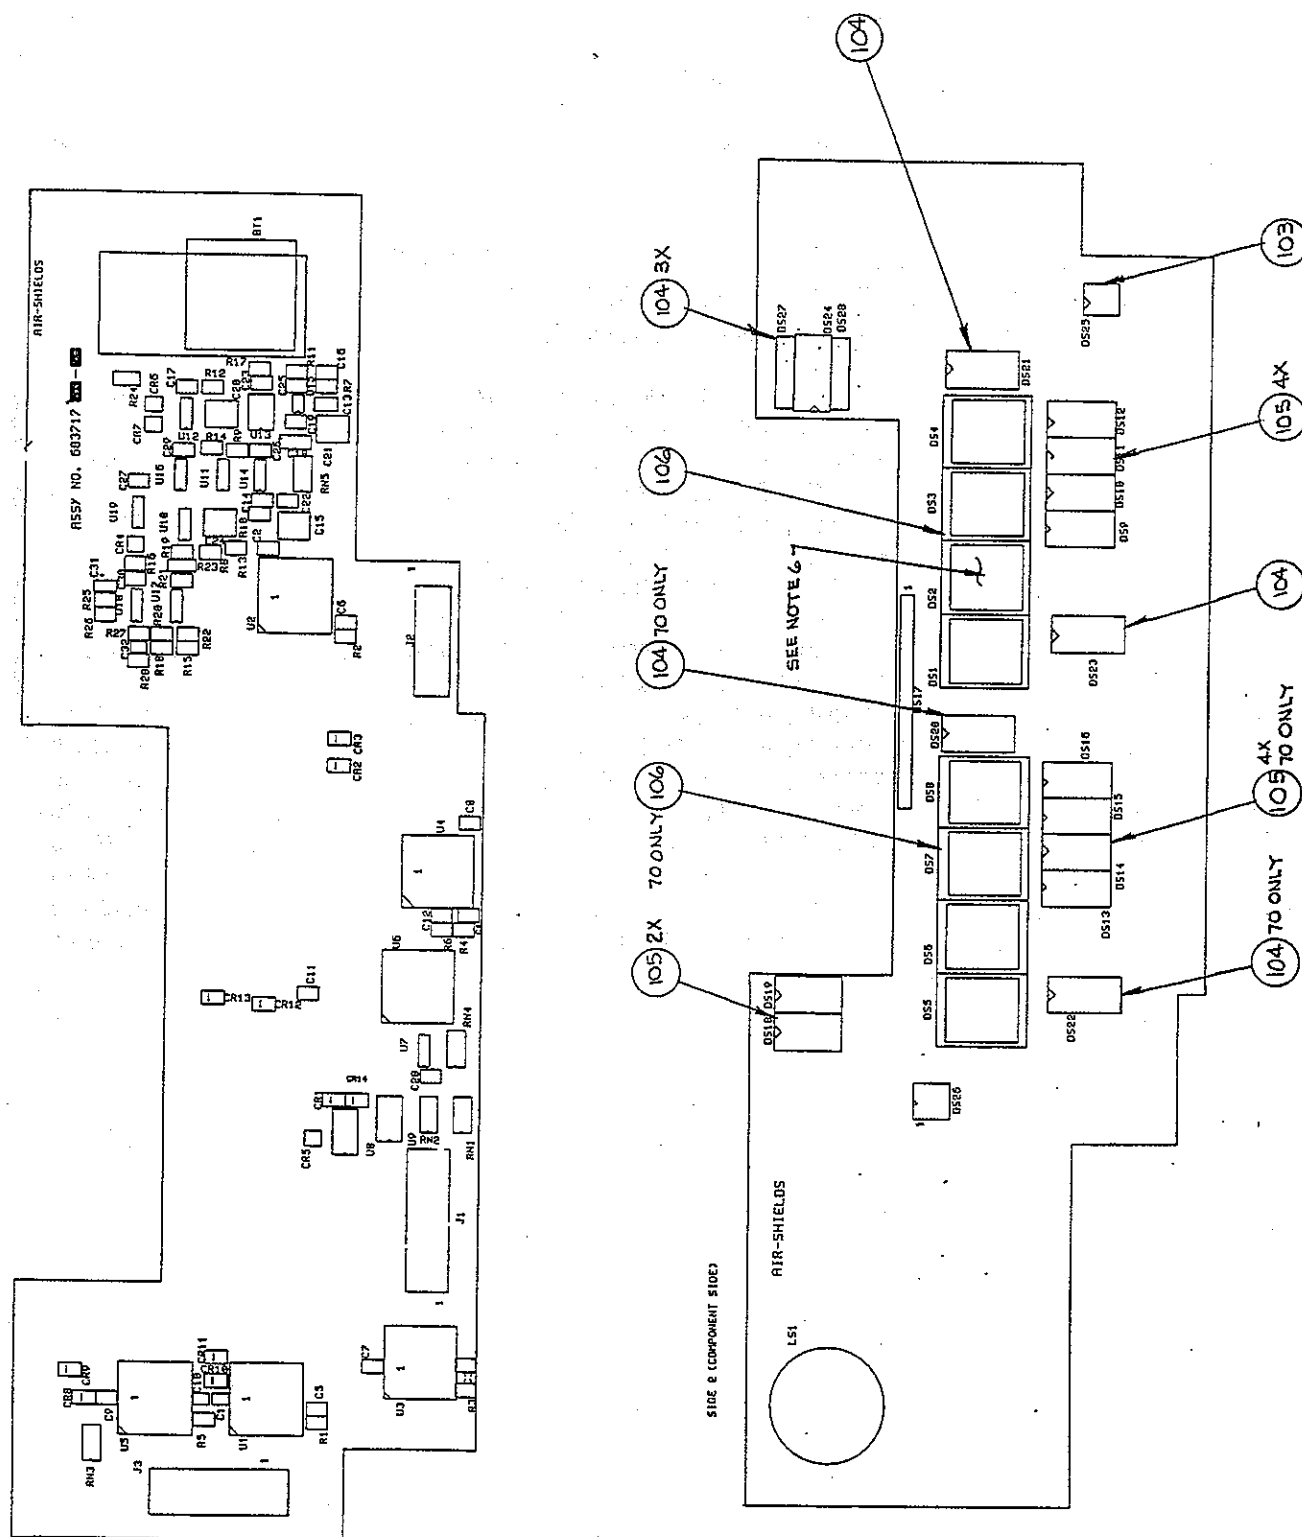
PARTS LOCATION DIAGRAM, DISPLAY BOARD
